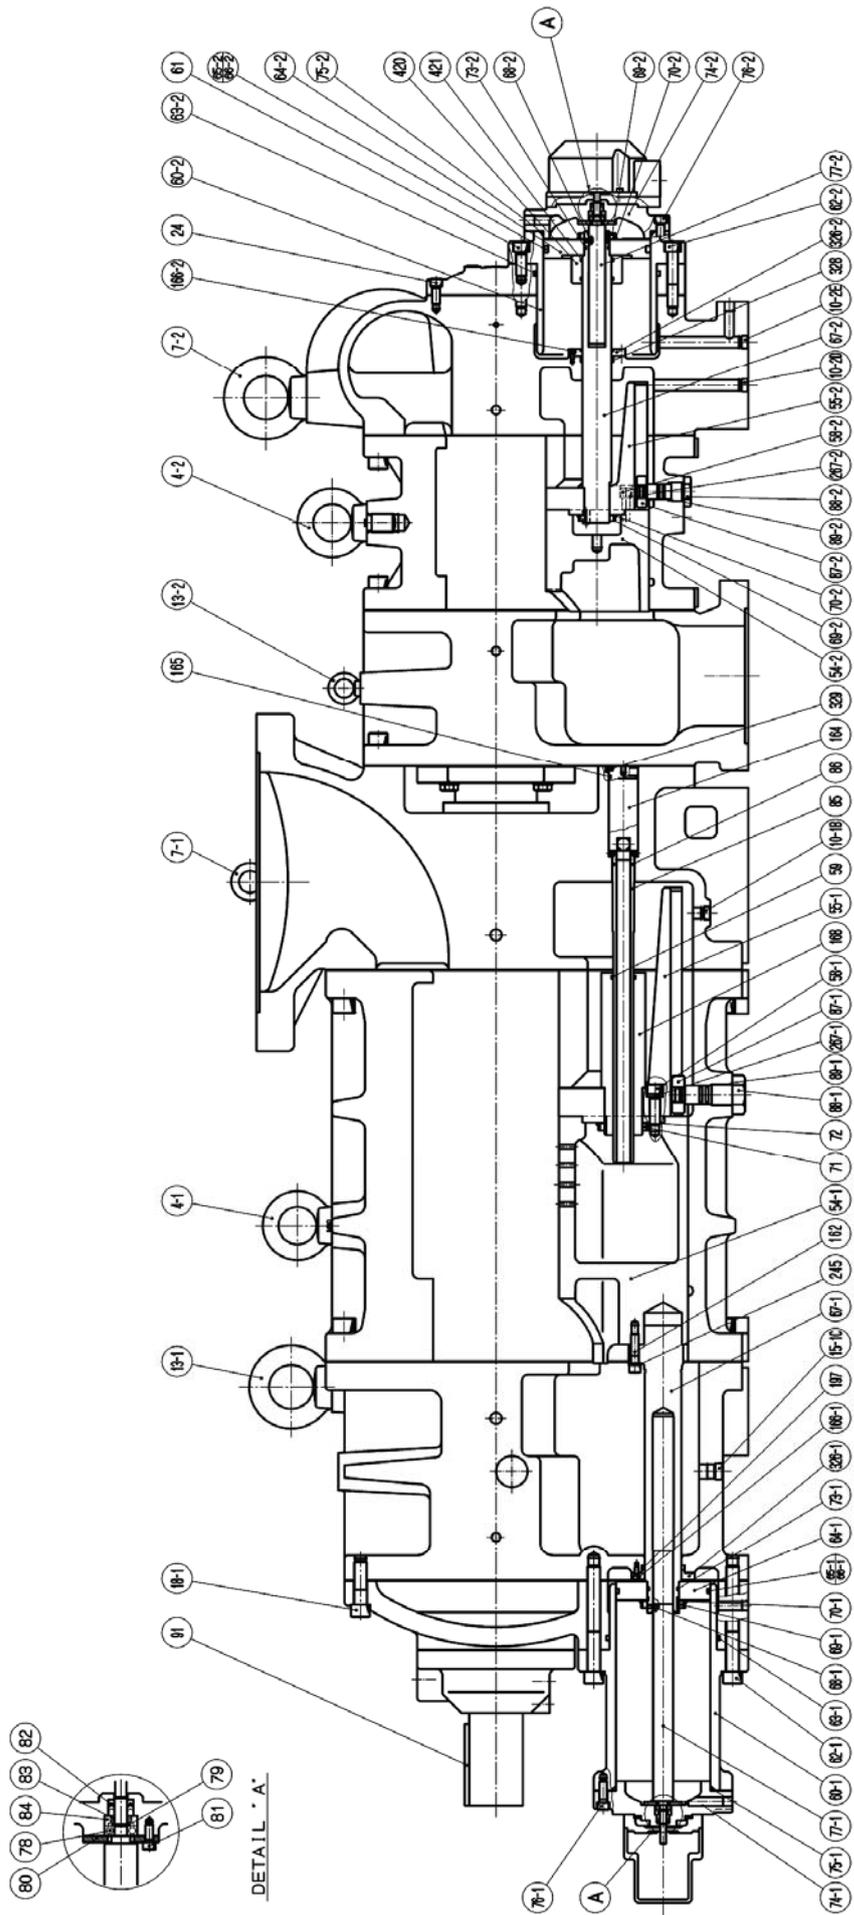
3225LLSC Assembly Sectional View (Vertical)
